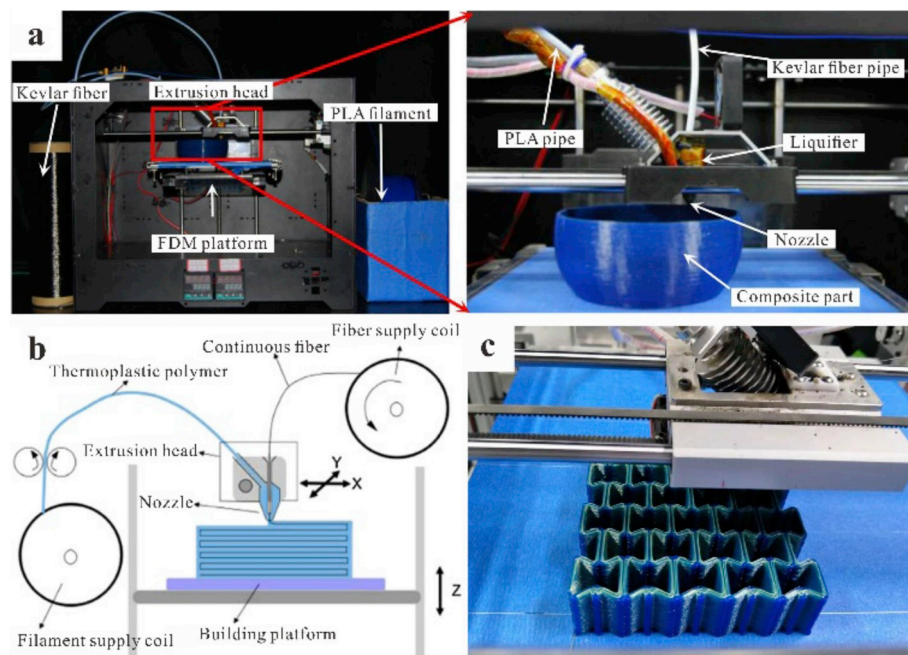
Equipment and scheme of 3D printing for CFRTPC auxetic honeycombs: (a) setup for 3D printer [32], (b) 3D printing process for CFRTPCs [30], and (c) 3D printing process for CFRTPC auxetic honeycomb.
